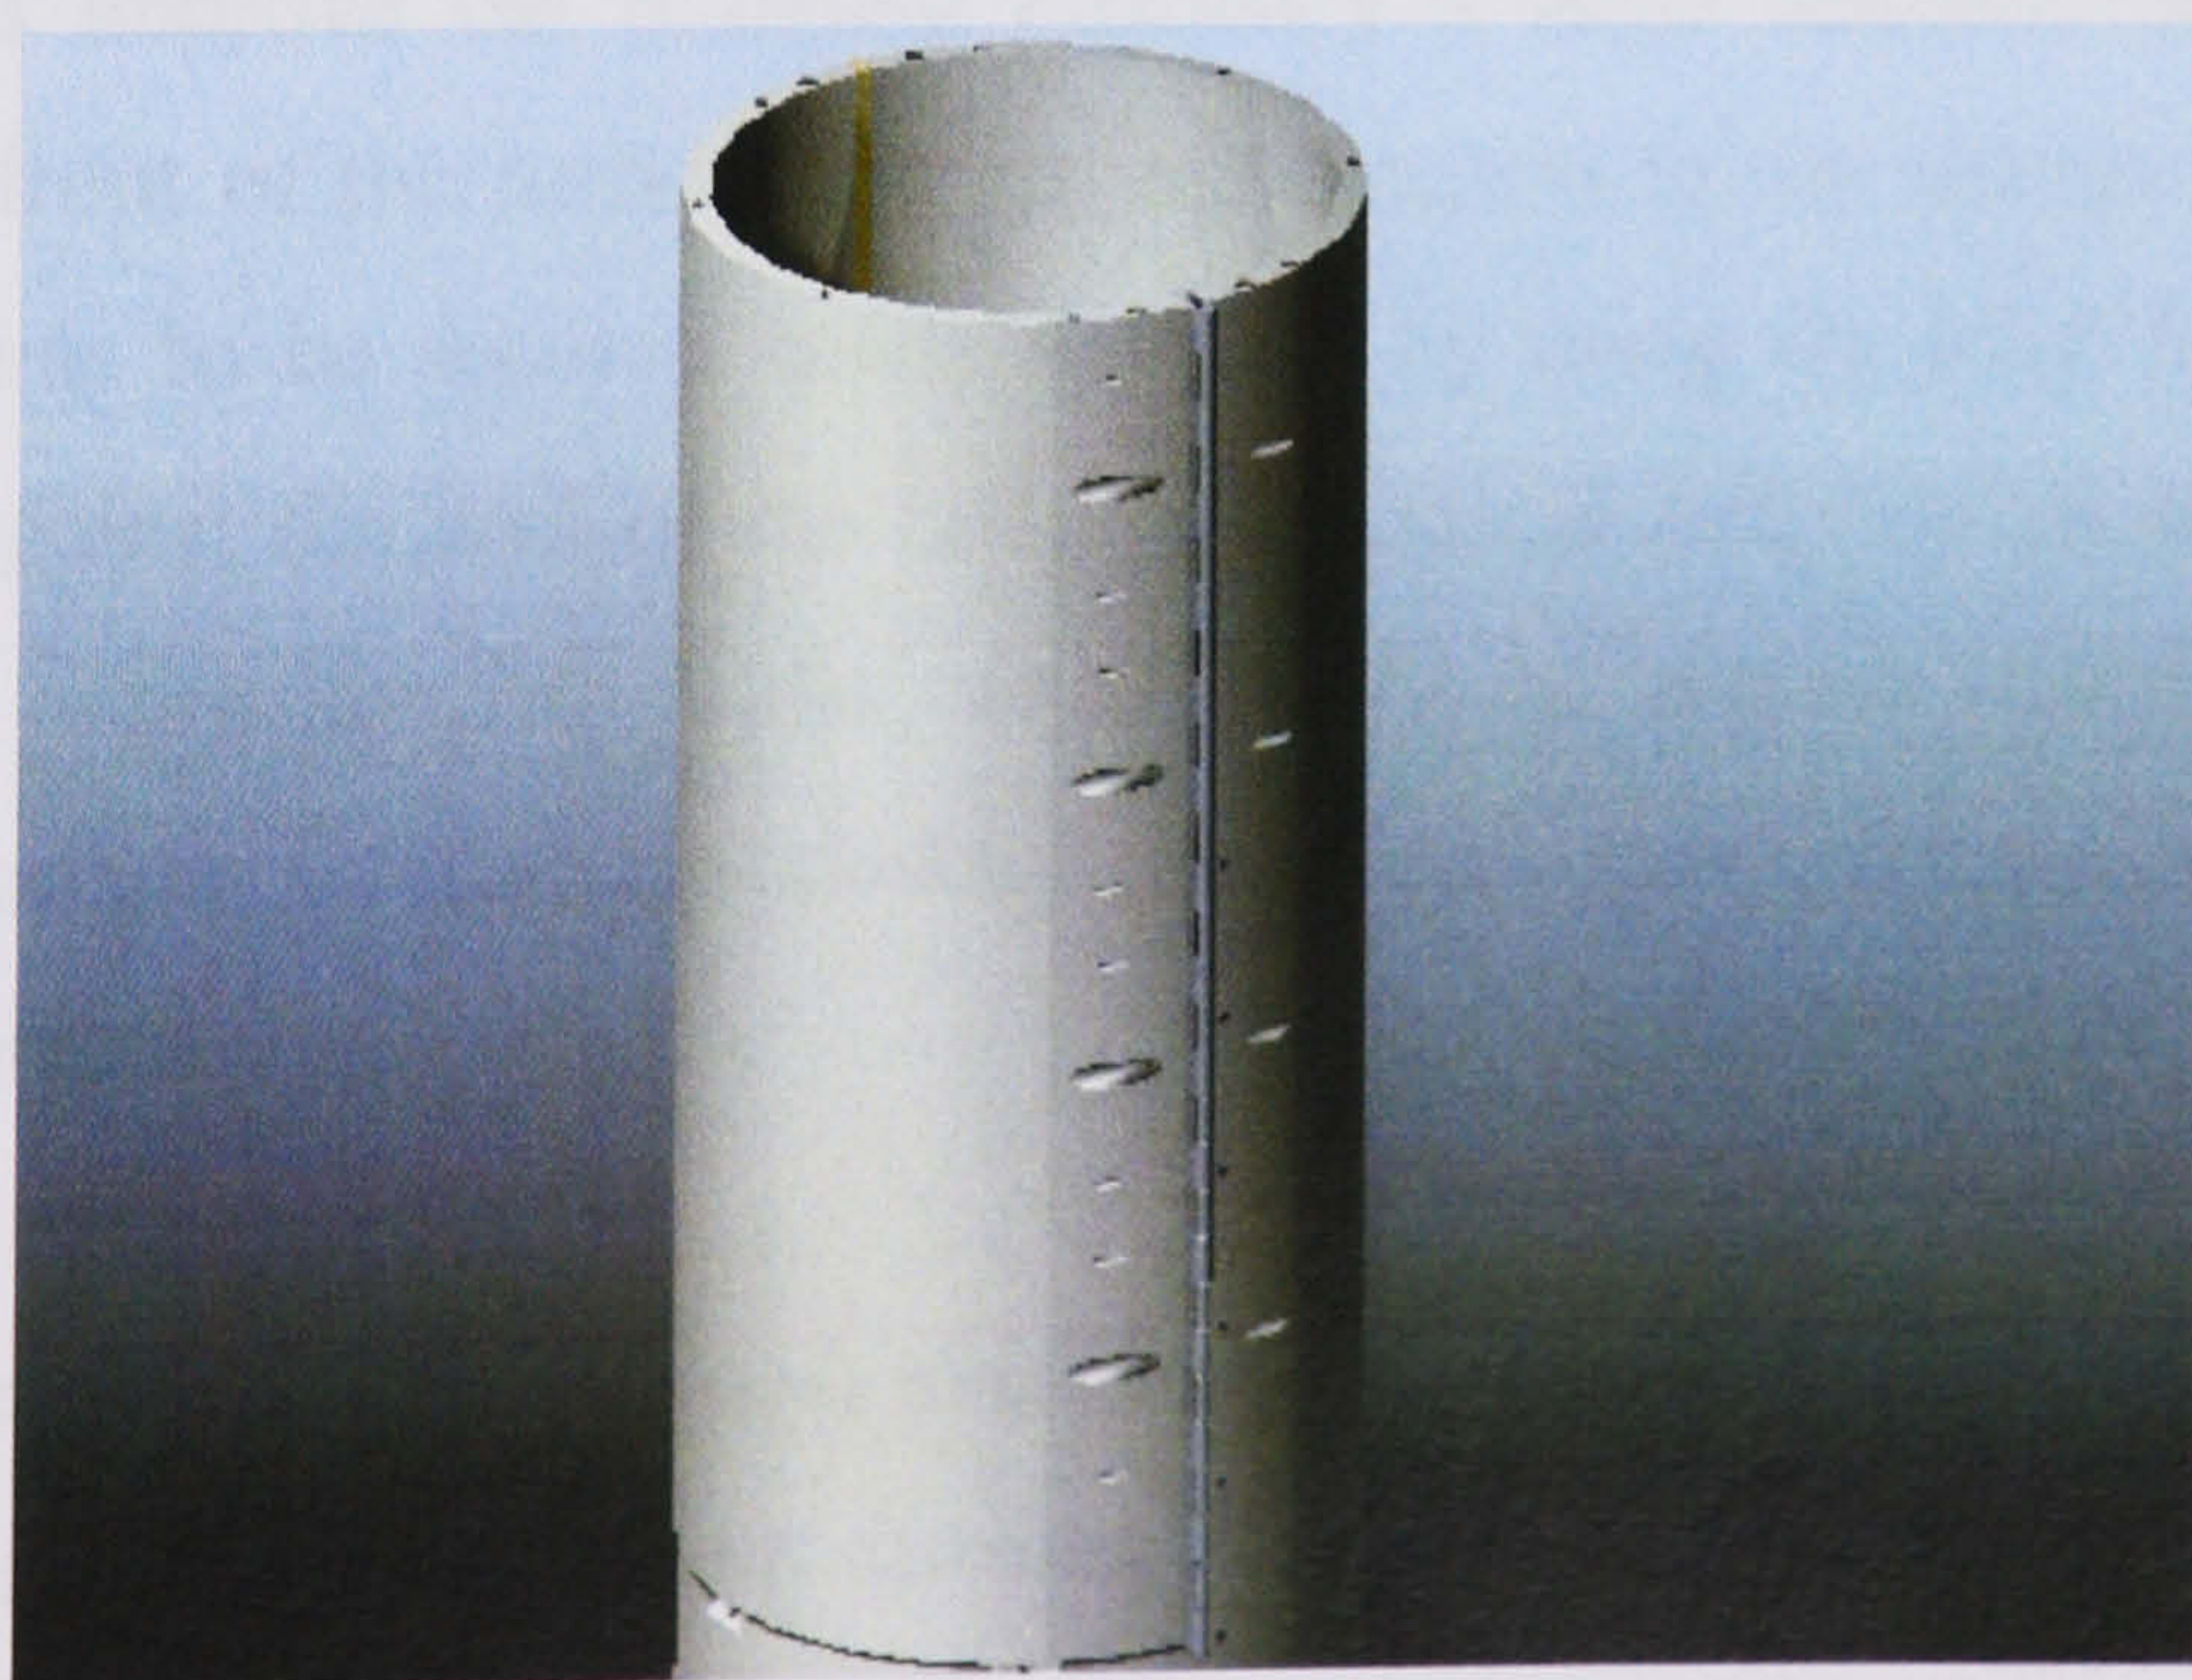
Solidworks rendering of the body of the frame with door attached by hinge. The four bolt holes can be seen as can the mounting holes for the top plate.
